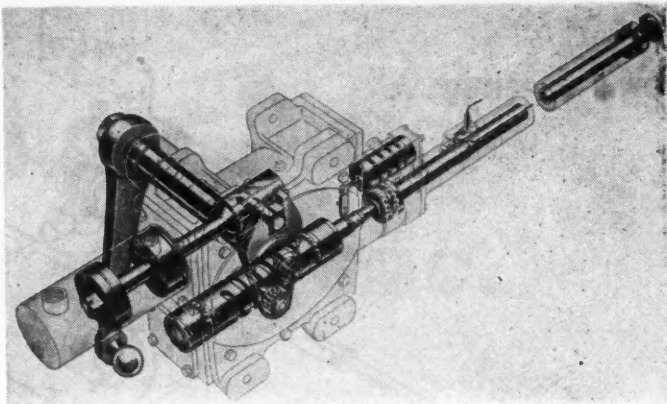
ABOVE. The Ross assembled gear. RIGHT, Fig. 2. Phantom view of unit, showing operation of power cylinder and control valve
